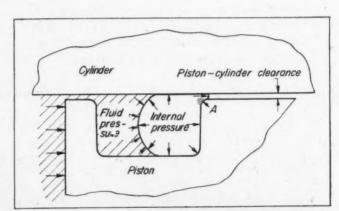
Extrusion of O-ring seal into piston-cylinder clearance. Seal ruptures due to tension and shear at corner "A"
